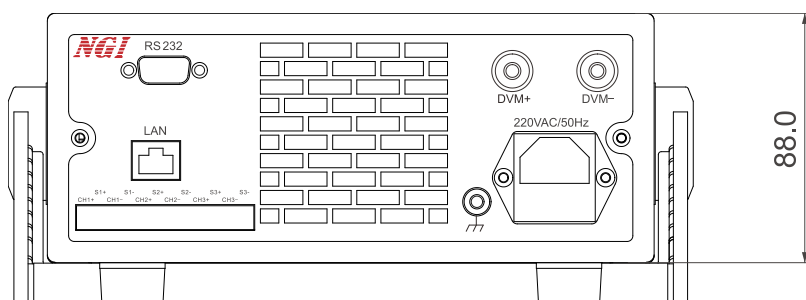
Rear Panel Dimension(mm) (N341XP Series)
